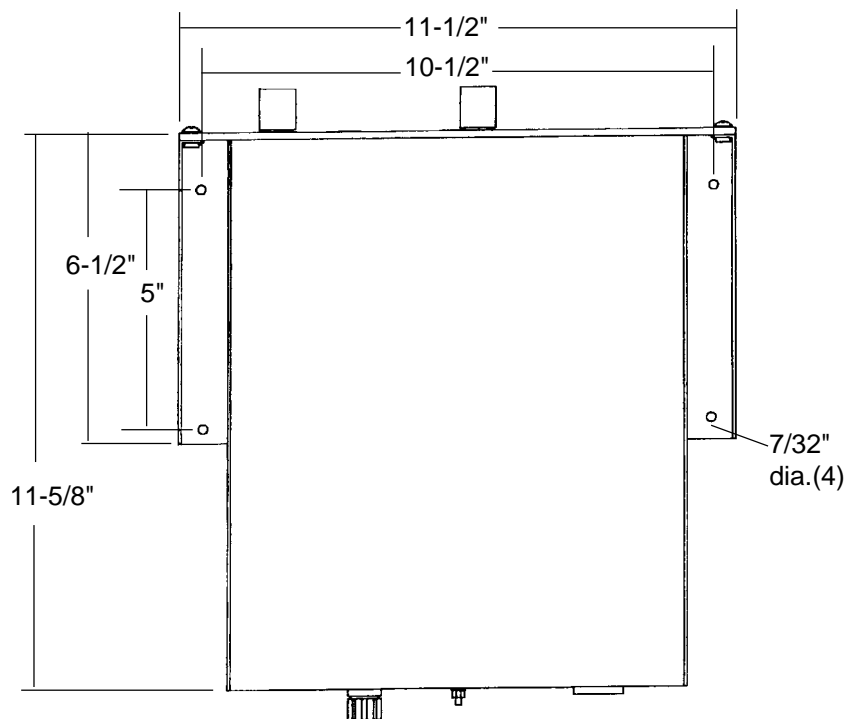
B Remote V/C Module Mounting Dimensions (Digital Remote Shown)
